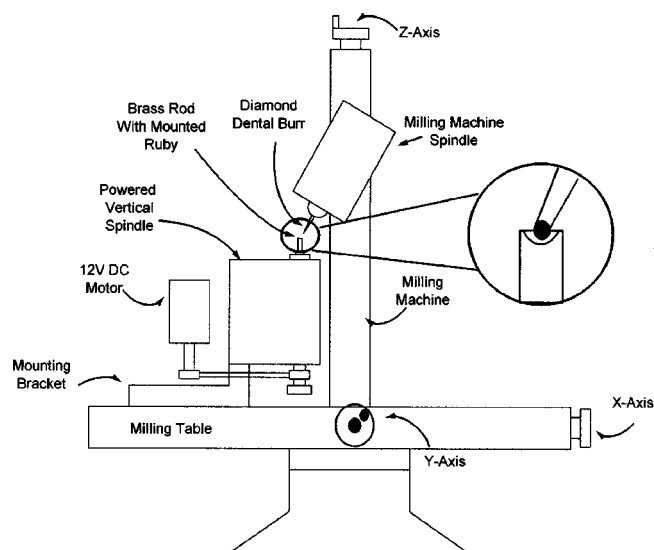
Schematic drawing of the sphere grinder. The inset in the circle at the right shows an expanded view of the hemisphere mounted in a brass rod with the diamond burr tip grinding a hemispherical recess.
